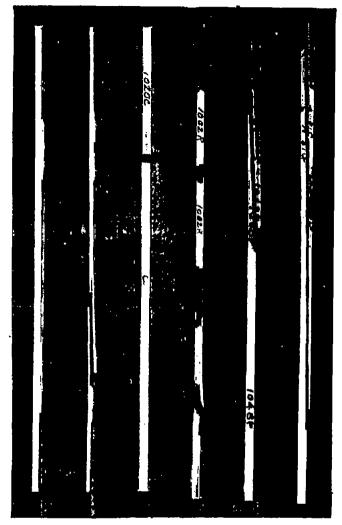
Dynamic tension specimens showing type of fracture; left to right, materials CL, C, R, P and G
